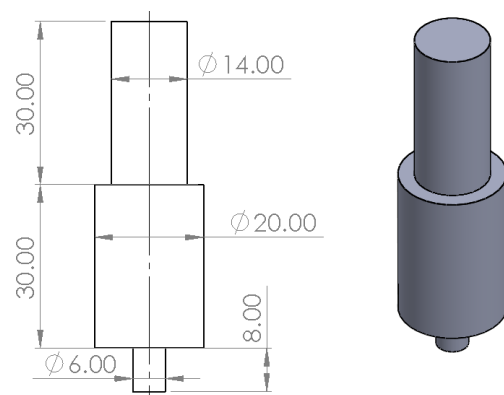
A schematic illustration of the FSP tool (Dimensions are in mm).
